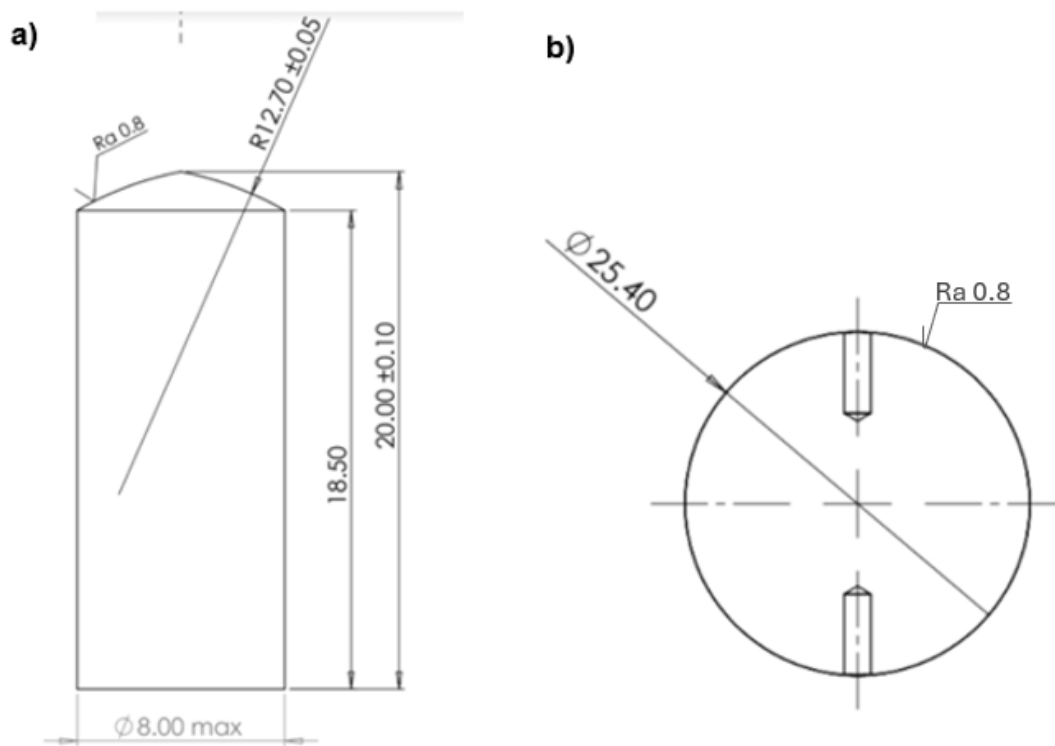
Dimensions of the samples used in the test a) pin b) disc
